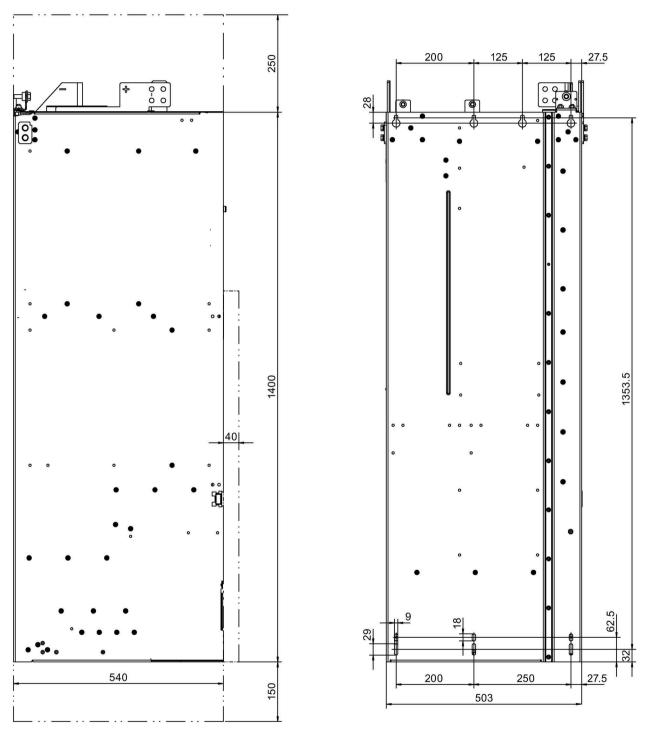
Dimension drawing Motor Module, frame size HX Side view, rear view
